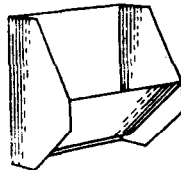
CONTINUOUS ELEVATOR BUCKET
